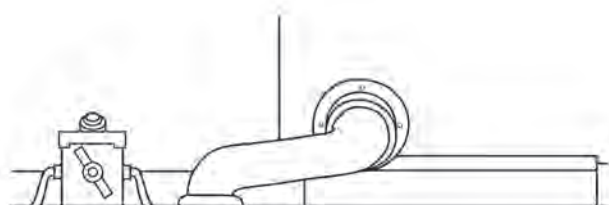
Original straight pattern outside steam pipe with mechanical lubricator in first position.
